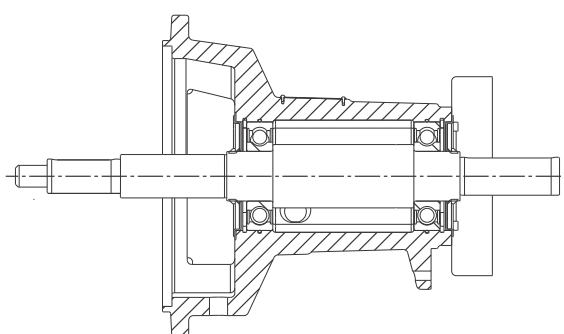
Bearing bracket with closed, greased-for-life bearings
